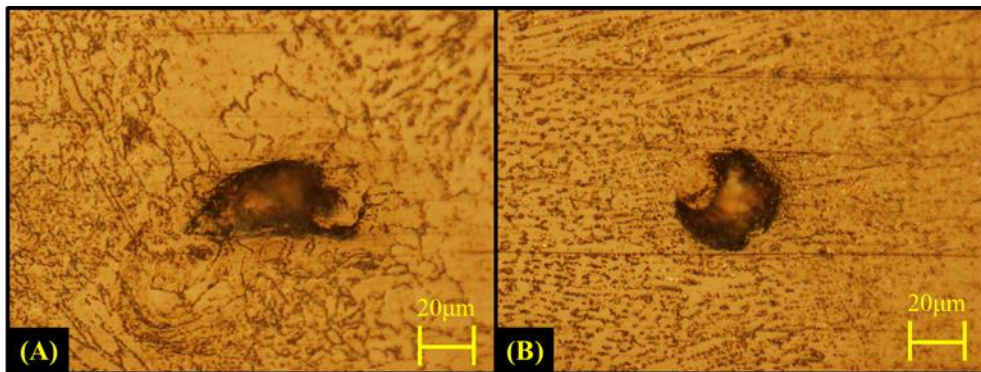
Defects on SLM+EBW sample 17A/B (213.2 J/mm) weld boundary
